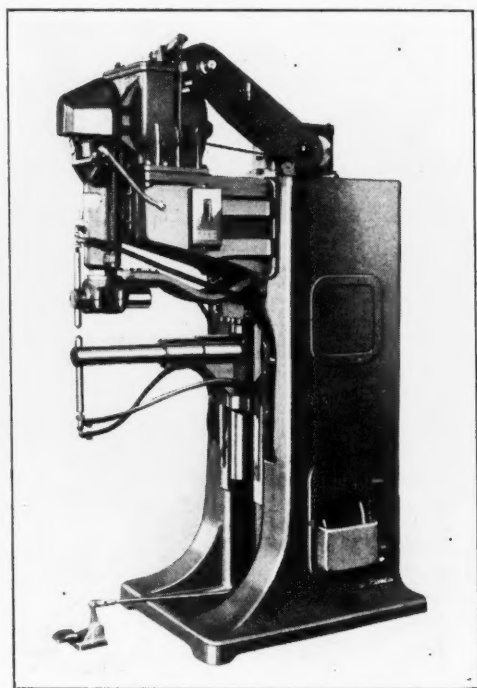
Automatic Spot Welder with Driving Mechanism on Top
